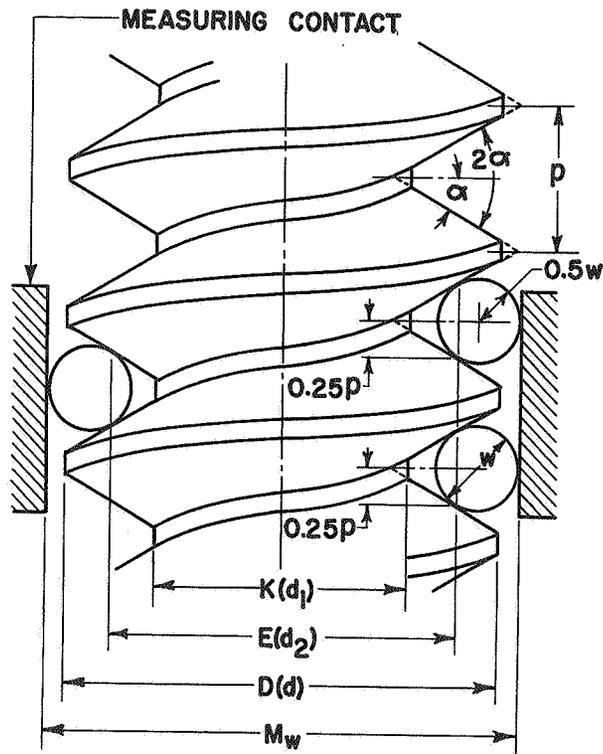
Three-wire method of measuring pitch diameter of straight thread plug gages.
